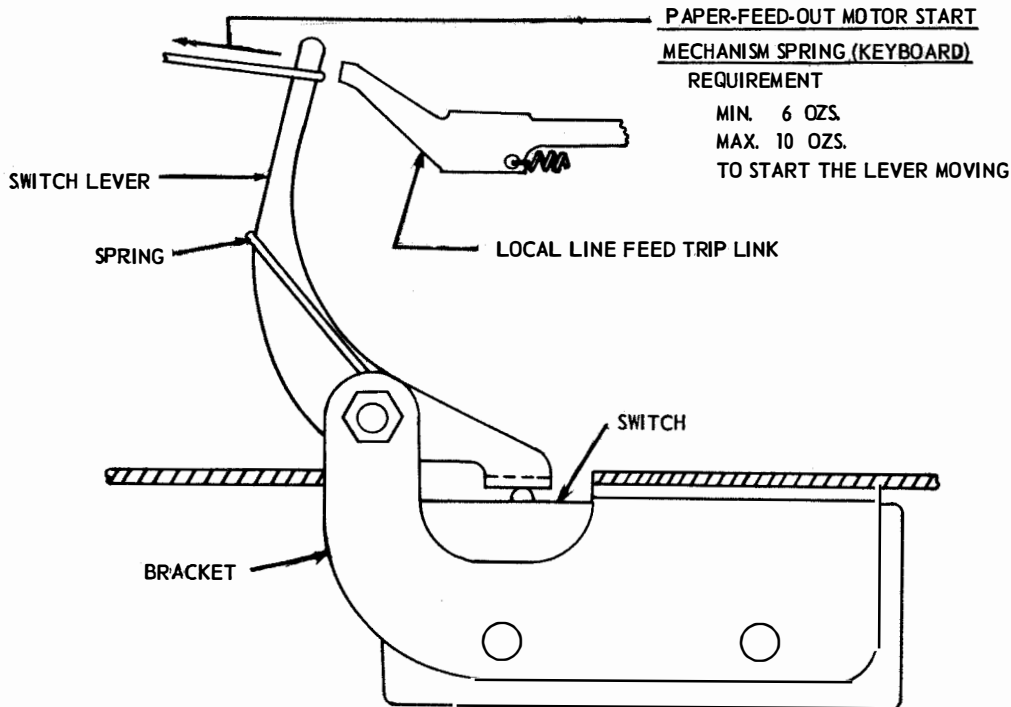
KEYBOARD, MARGIN INDICATING AND PAPER FEED-OUT MECHANISMS
